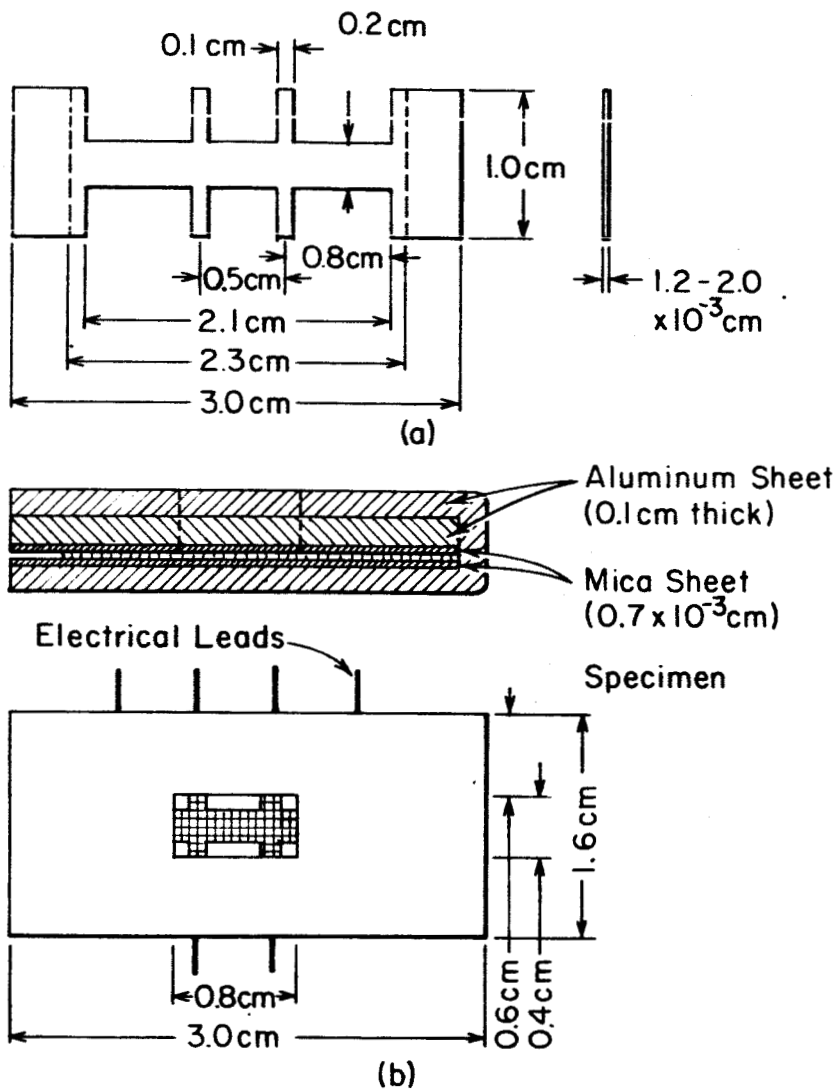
(a) Shape and dimensions of specimens for electrical measurements.
